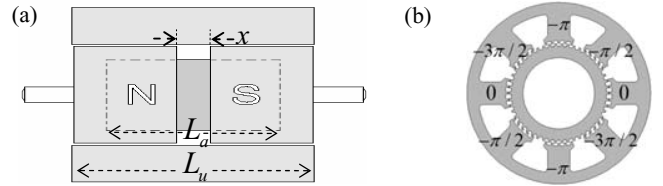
(a) Longitudinal view of the hybrid machine, (b) Axial view
